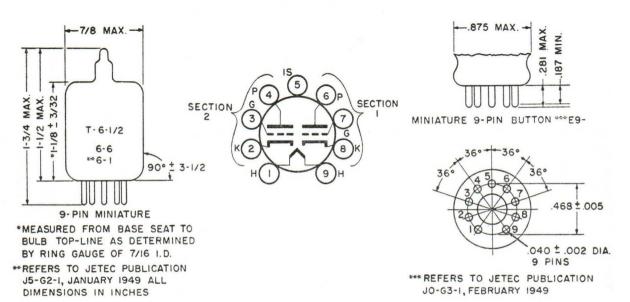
Outline Drawing and Base Diagram of Tube Type JAN-5670.
